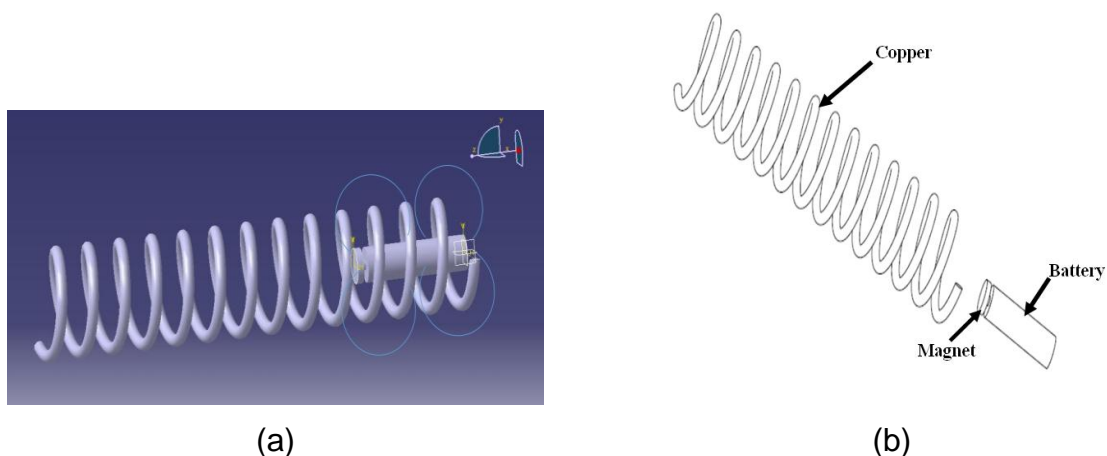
(a) Illustration of the maglev prototype using magnetic copper coil, (b) The assembly drafting of magnetic copper coil
